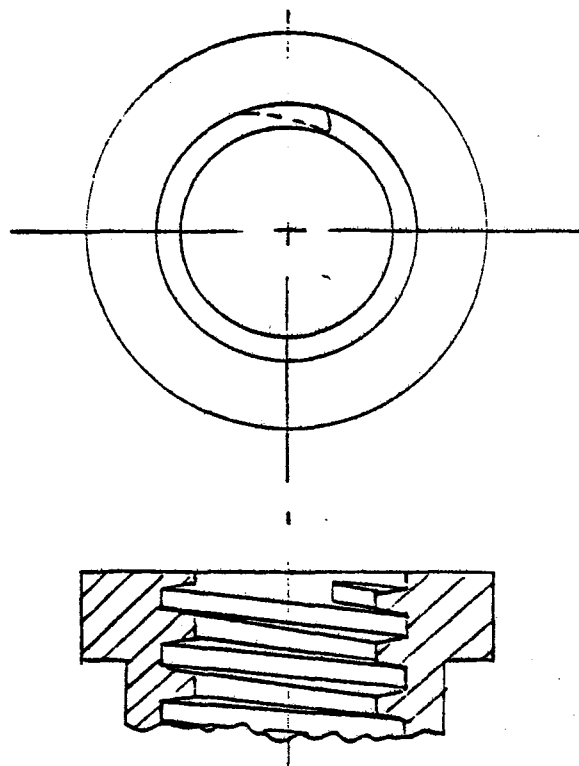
PROPOSED METHOD OF THREAD RELIEF
